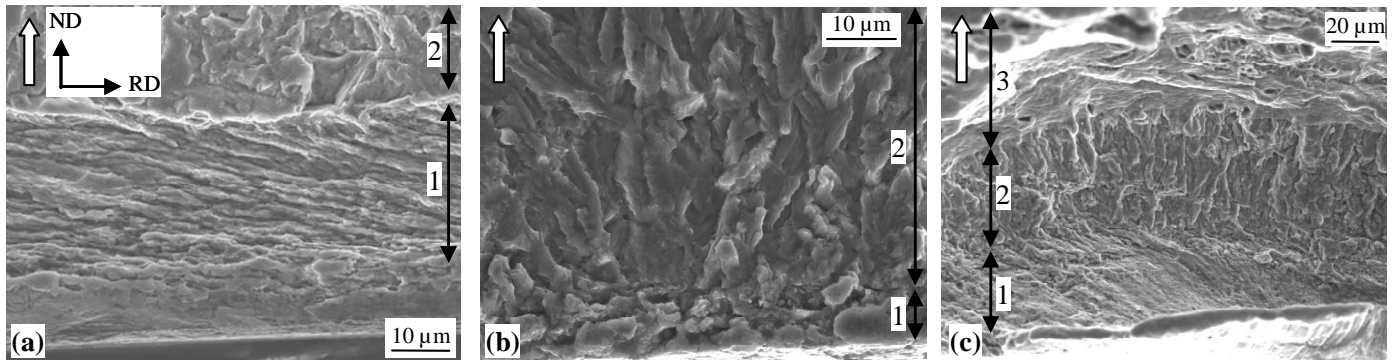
Fracture surface of KB bearing specimens (a) with a ground bottom surface,  $\Delta\sigma = 306 \text{ MPa}$ , lifetime  $\sim 13,000$  cycles with the crack propagating in mode I along the exposed KB, (b) with an as-welded bottom surface; initiation at, and propagation away from the KB,  $\Delta\sigma = 279 \text{ MPa}$ , lifetime  $\sim 70,000$  cycles; (c) with a ground bottom surface,  $\Delta\sigma = 279 \text{ MPa}$ , interrupted after 15,000 cycles. (1), (2), and (3) respectively denote cracking along the KB, away from the KB and under uniaxial tension. Average crack propagation indicated with a white arrow; same specimen orientation in (a,b,c)
